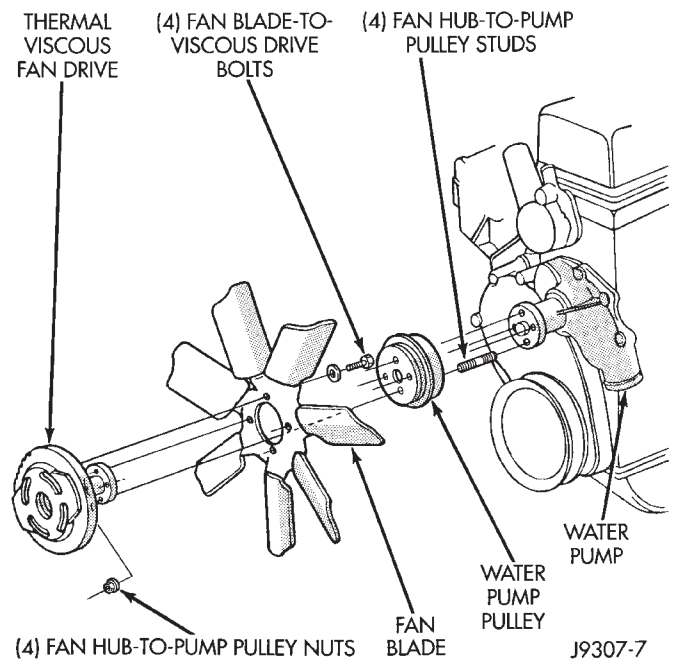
Fan Mounting Nuts—4.0L 6-Cyl. Engine
